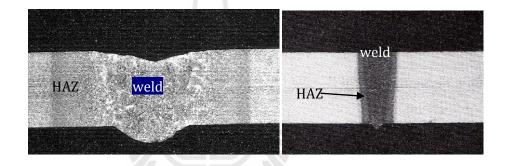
The comparison of welding method (left) GTAW and (right) laser welding (Dawes, 1992).
